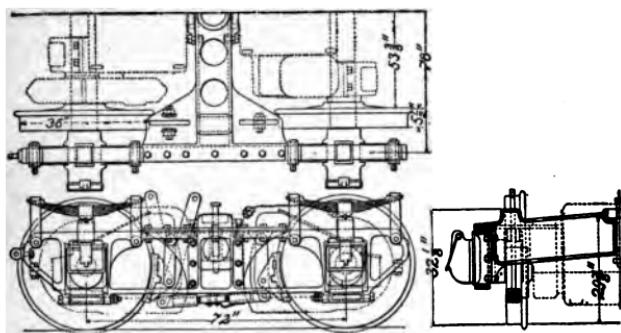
Motor truck, locomotive frame-rigid bolster.
